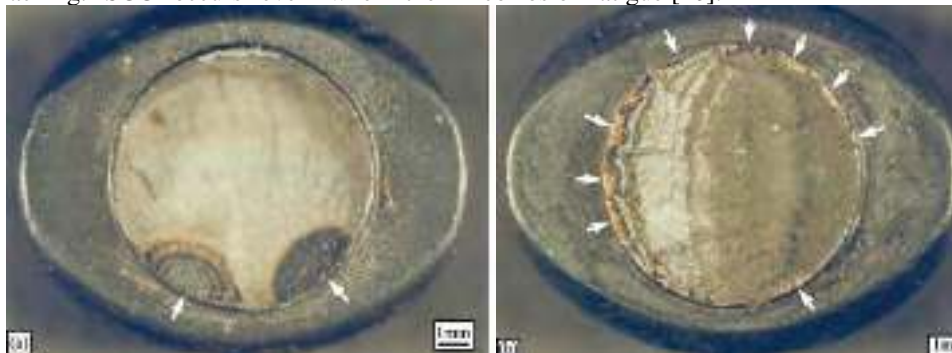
Connecting rod bolts damaged by corrosion fatigue [21]
